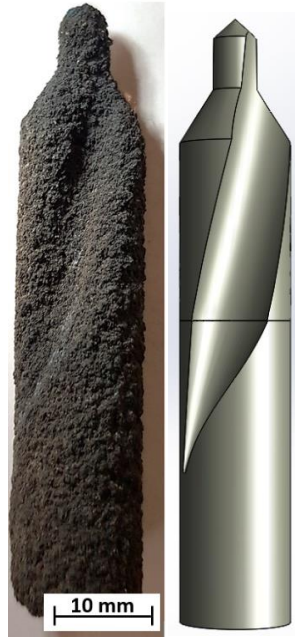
a) Printed drill bit, b) CAD used to fabricate drill bit
